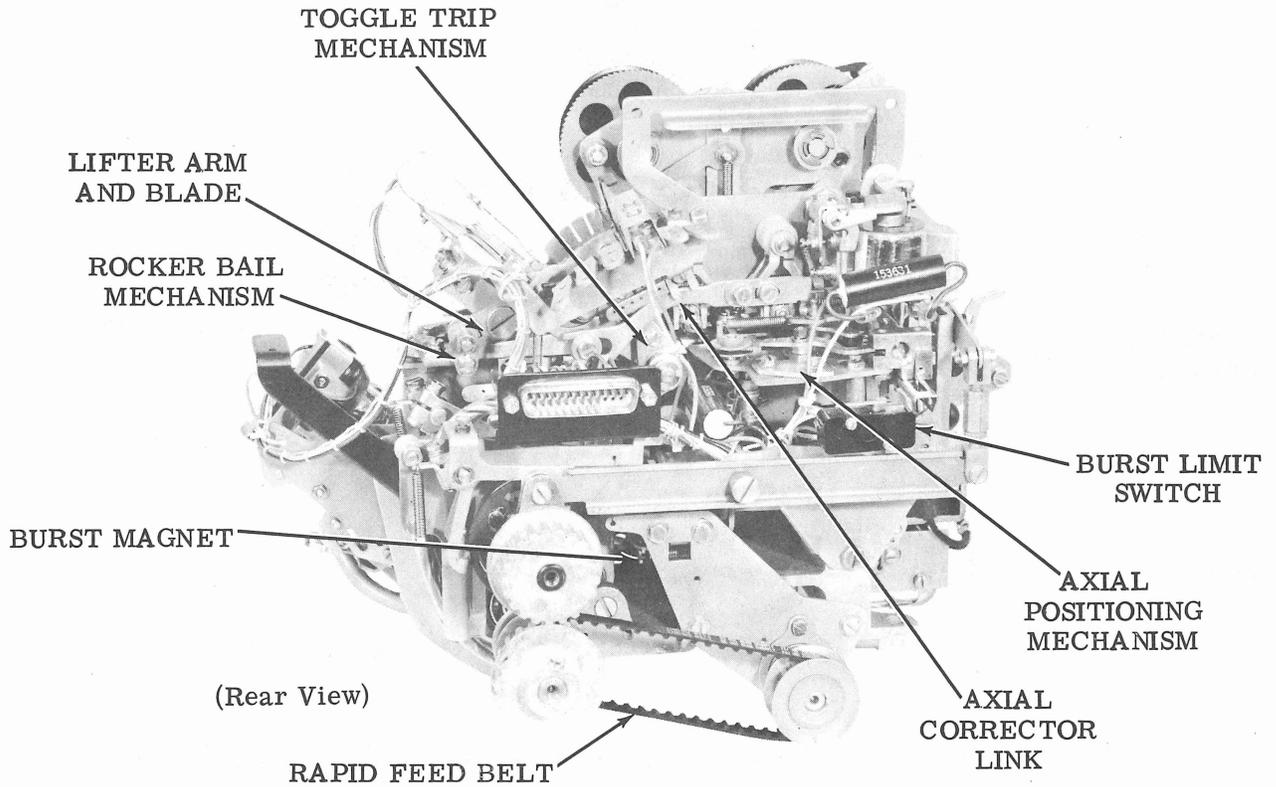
35 Edge Punched Card Typing Reperforator (Without Top Plates)
